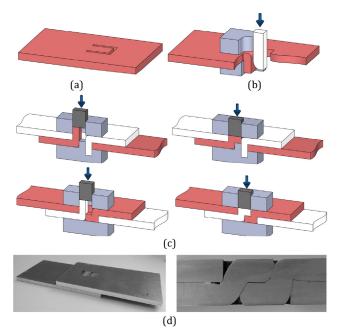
The new proposed joining by forming process: (a) partial cutting, (b) bending, (c) mechanical interlocking by sheet-bulk compression and (d) photograph with a cross section detail of the joint.
